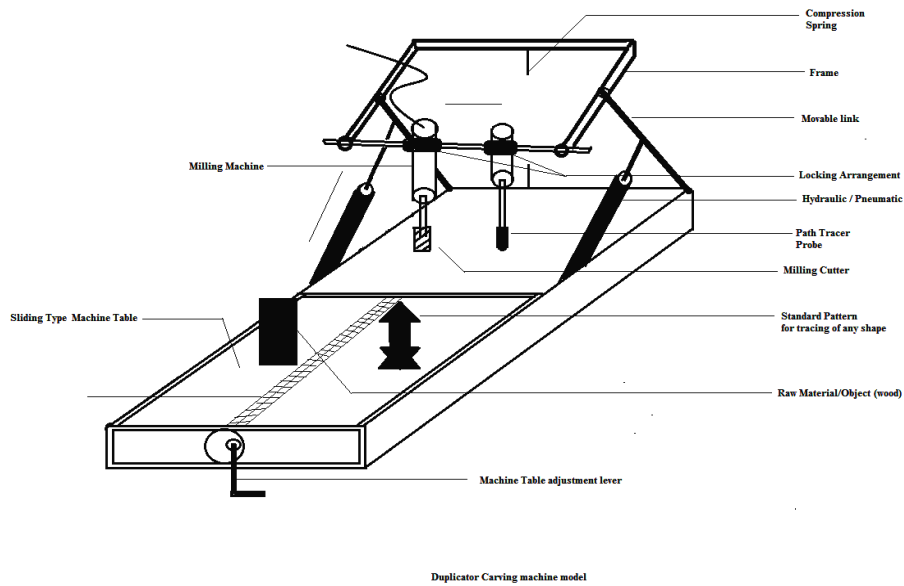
Model of Two dimensional wood duplicator machines.
